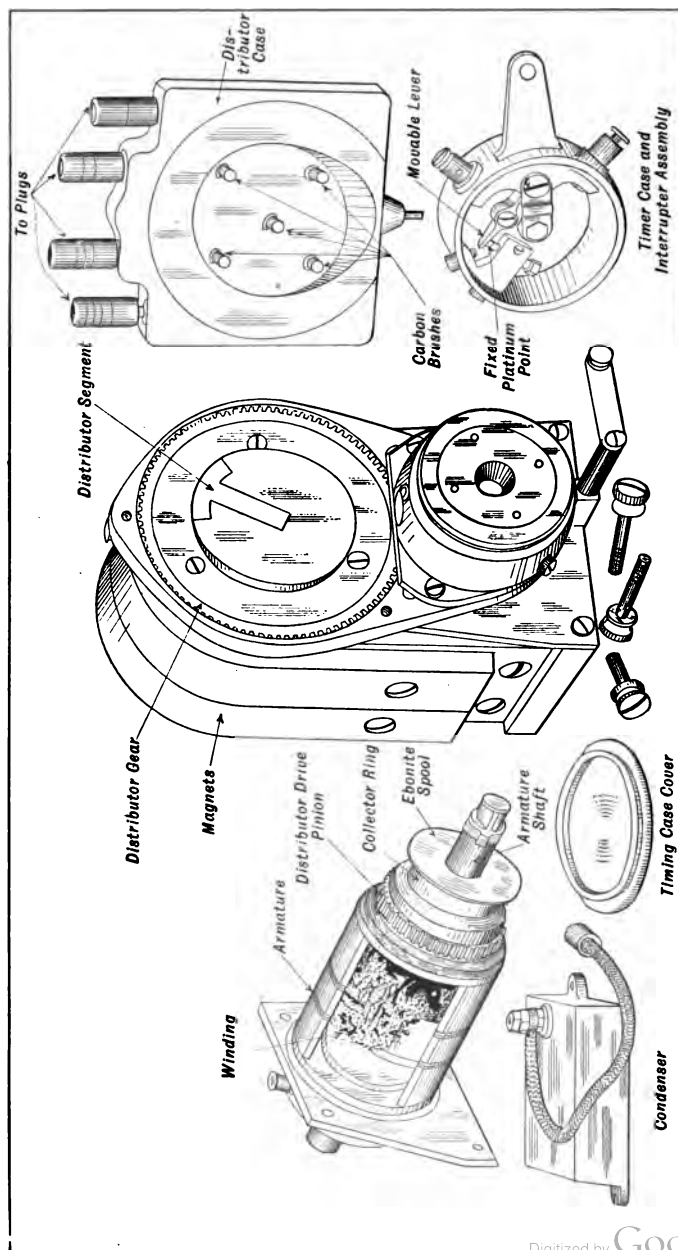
Partially Dismantled Four Cylinder Magneto Showing Important Parts of Current Producing and Distributing Element.
